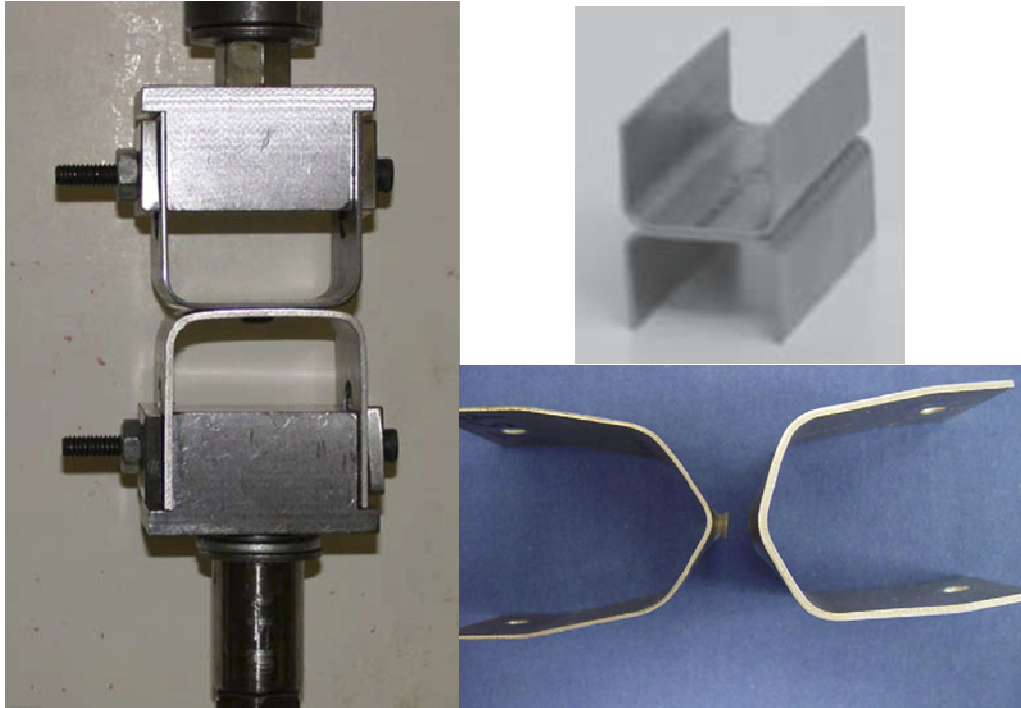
Pull test step-up showing specimen with a spot weld and spot weld failure [14].
